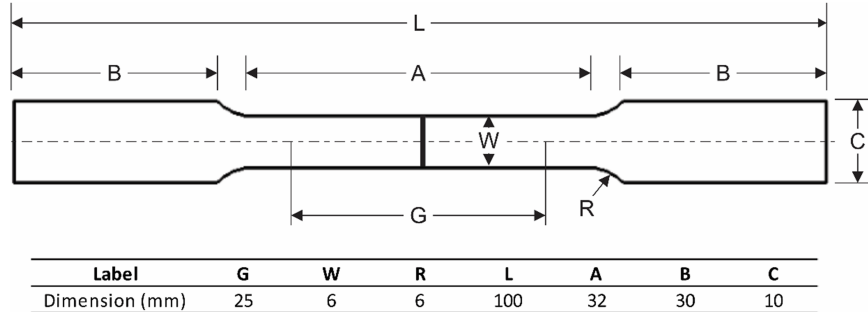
Subsize uni-axial tensile specimen dimensions
